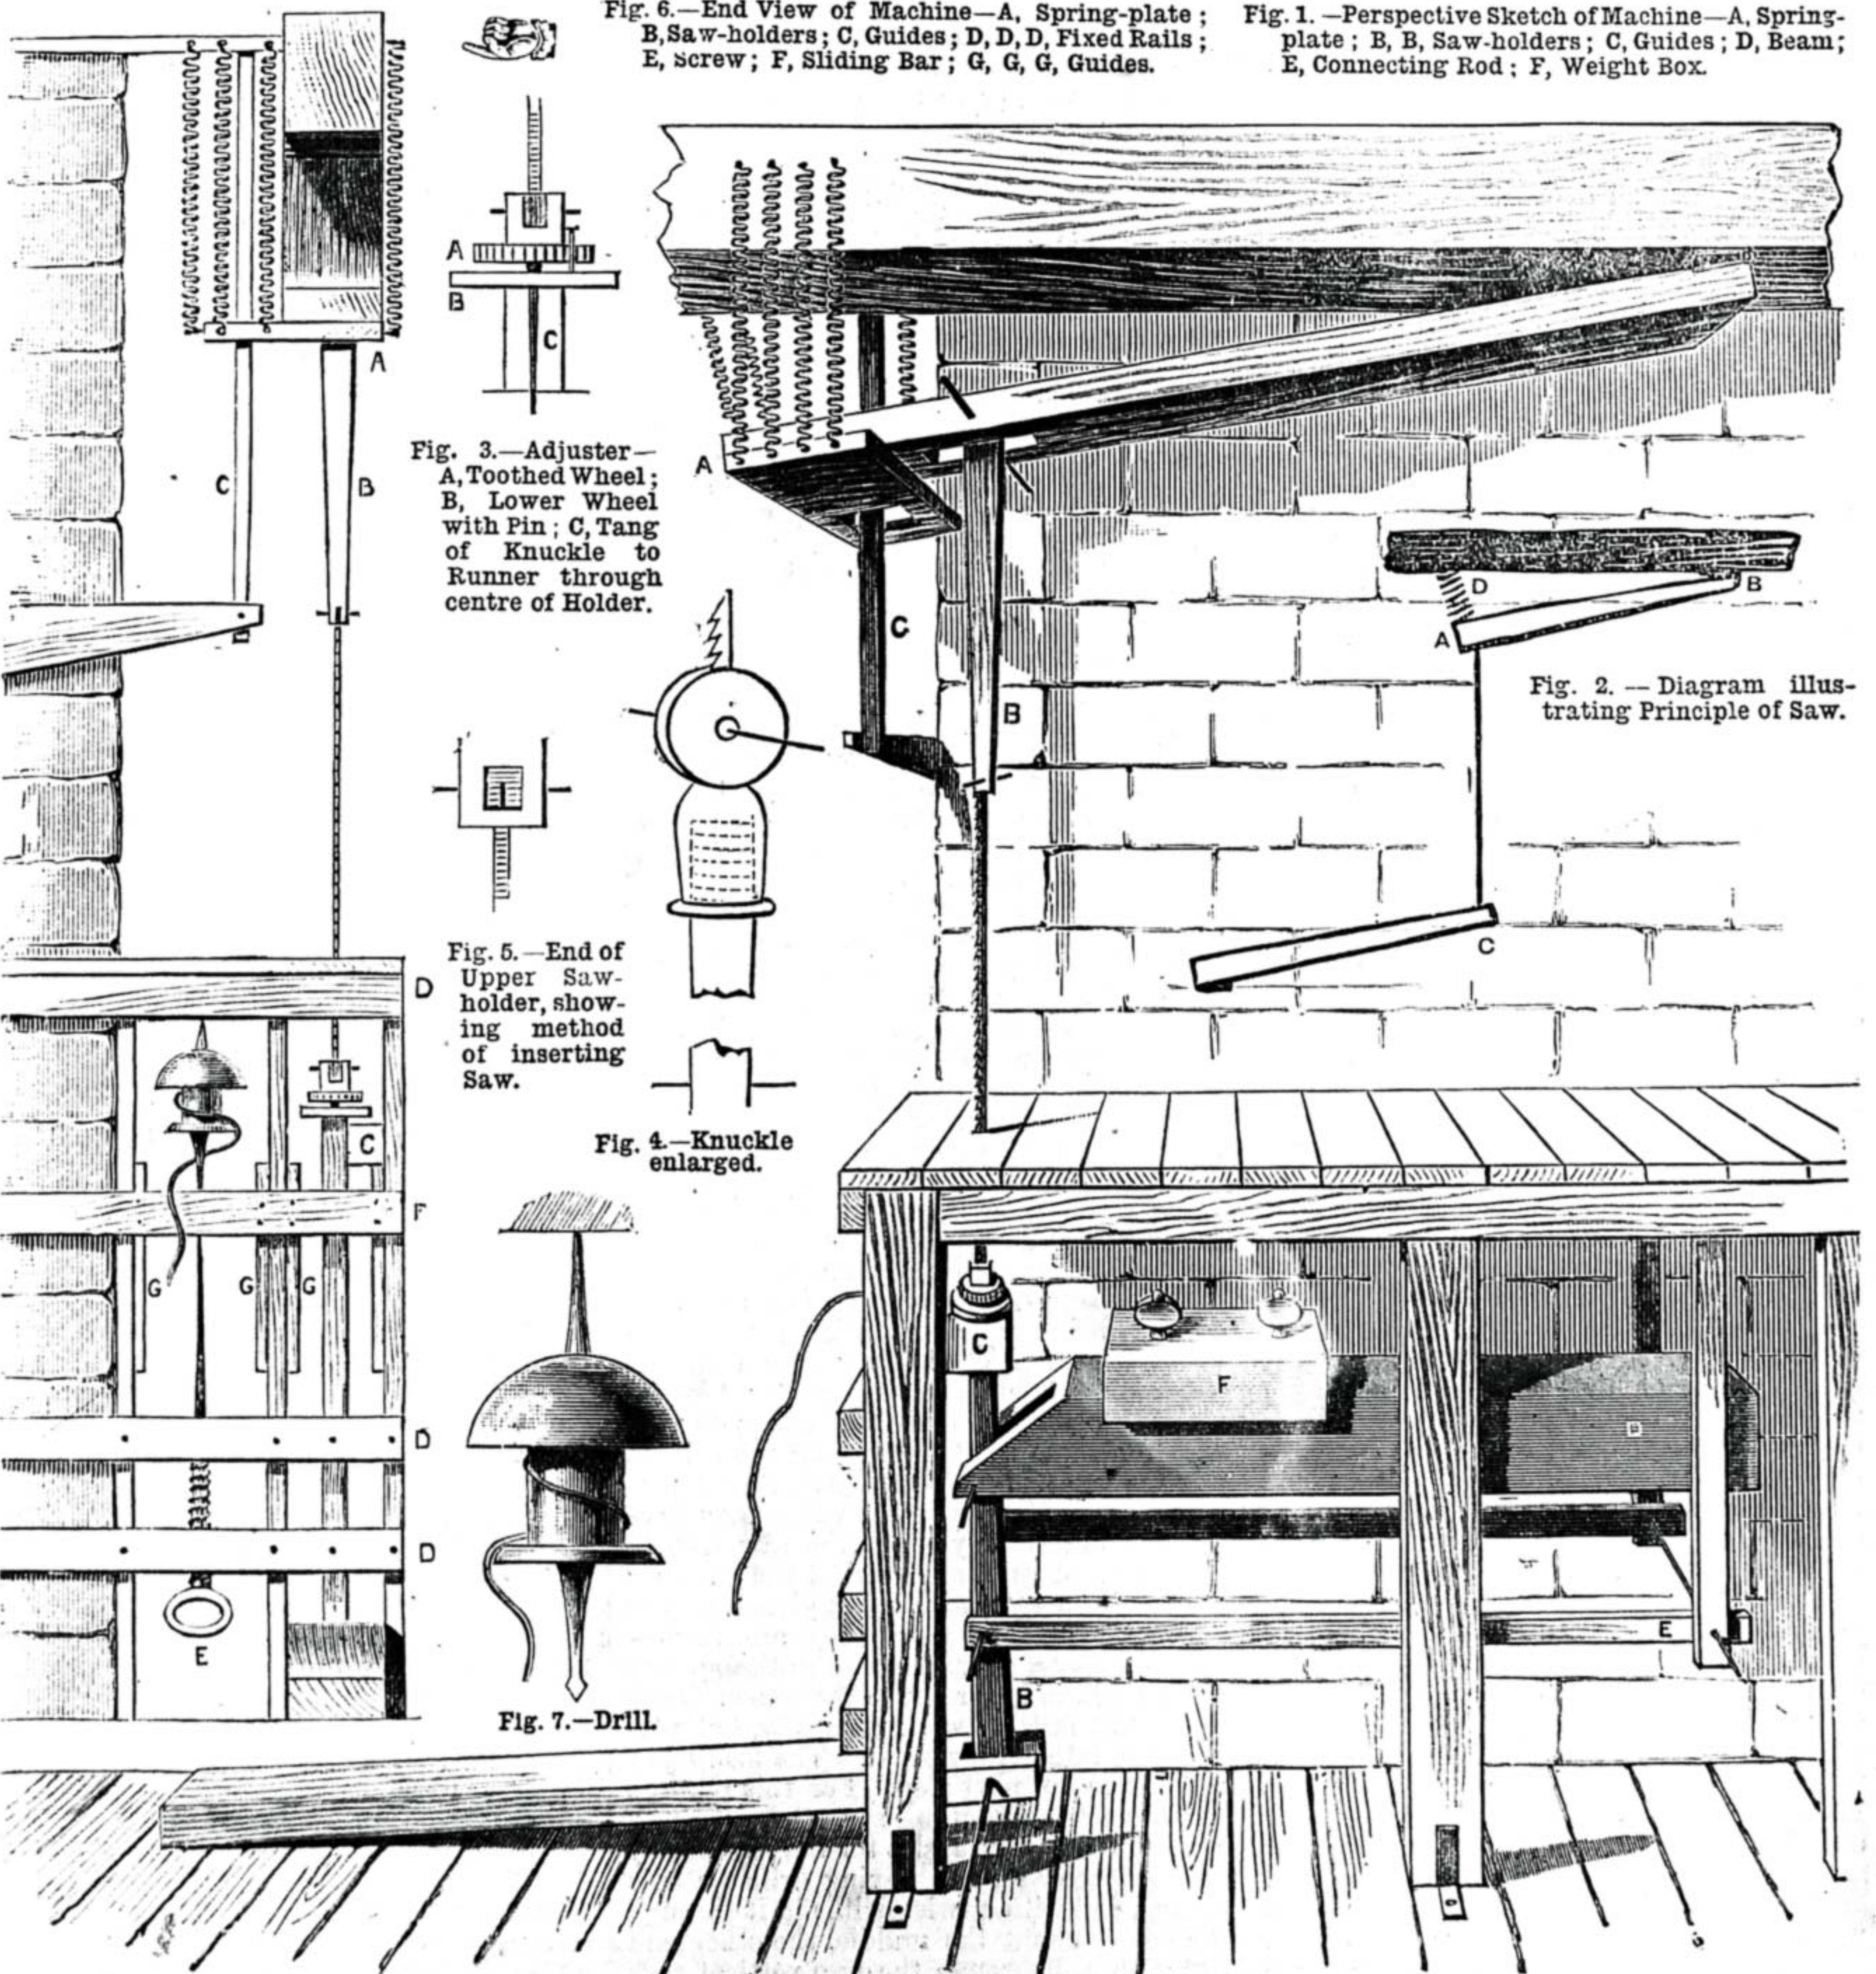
End View of Machine—A, Spring-plate; B, Saw-holders; C, Guides; D, D, D, Fixed Rails; E, screw; F, Sliding Bar; G, G, G, Guides.
